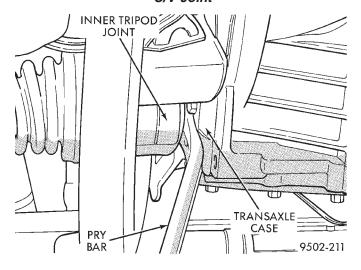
Disengaging Inner Tripod Joint From Transaxle
